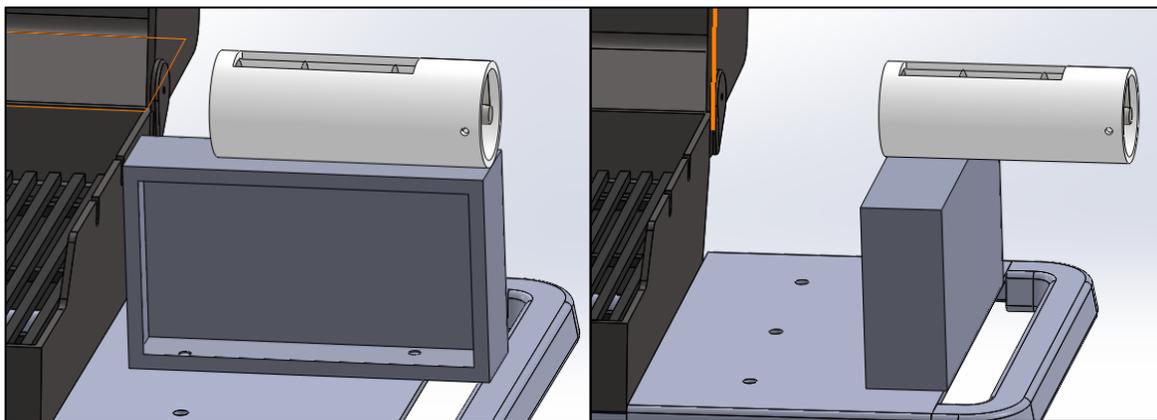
Orientations for auger attachment to enclosure showing parallel (left) and perpendicular (right) attachment alternatives
